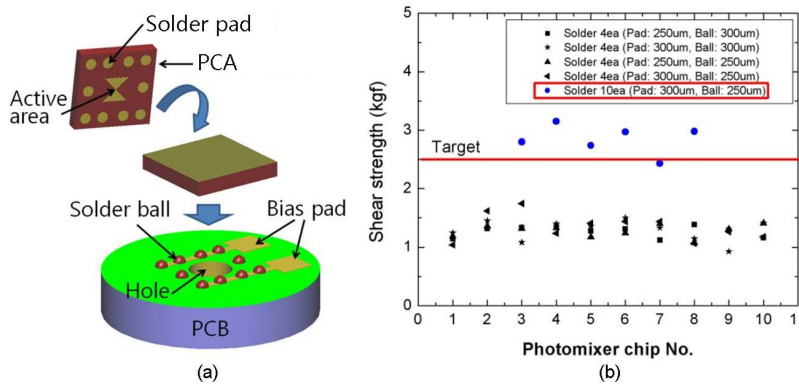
(a) Flip-chip bonding process and (b) shear strength test results for various solder and pad sizes and number of solder balls of PCB.
